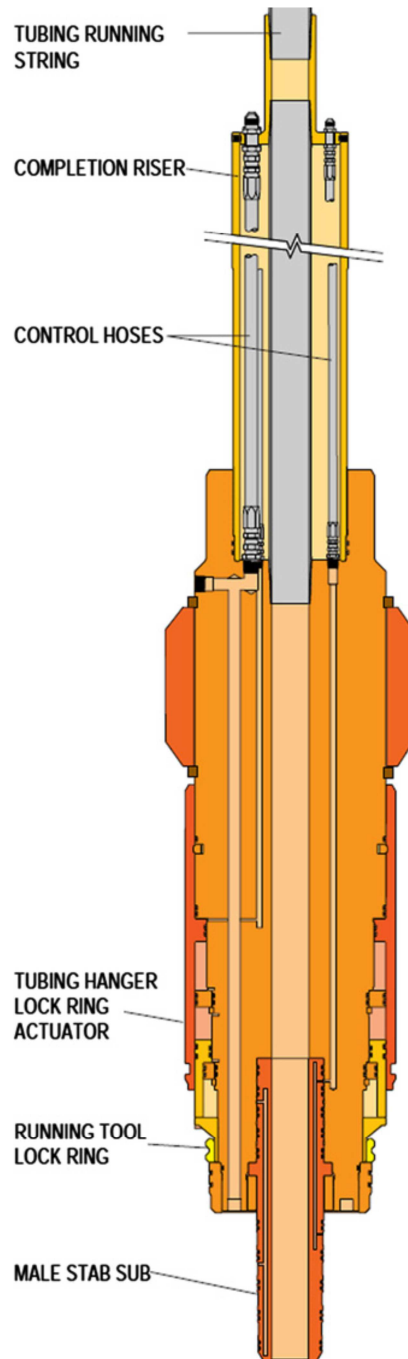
Tubing Hanger Running Tool (THRT) [Dril-Quip].
